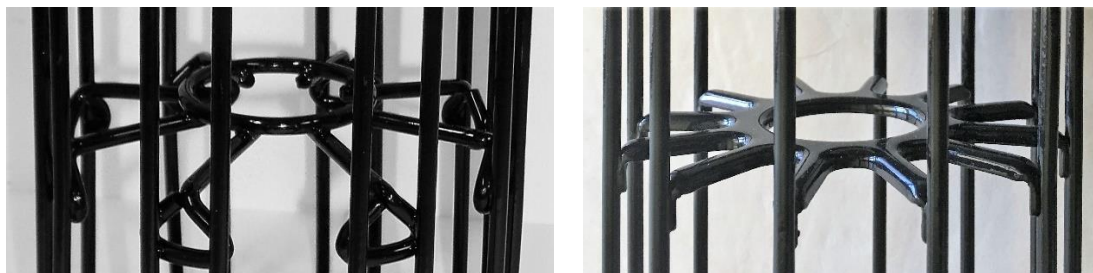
ESB filter cage support, Left: original wire design, Right: subsequent pressed metal component.
